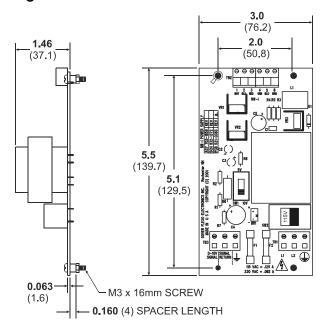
DIMENSIONS OF POWER SUPPLY (INDICATOR OPTION ONLY)
